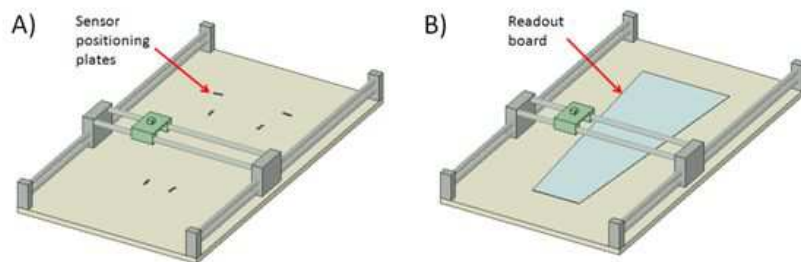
Principle of the chamber calibration: A) Measurement of the sensor positioning plates. B) Measurement of the strip positions and gluing of the plates to the connector side.
